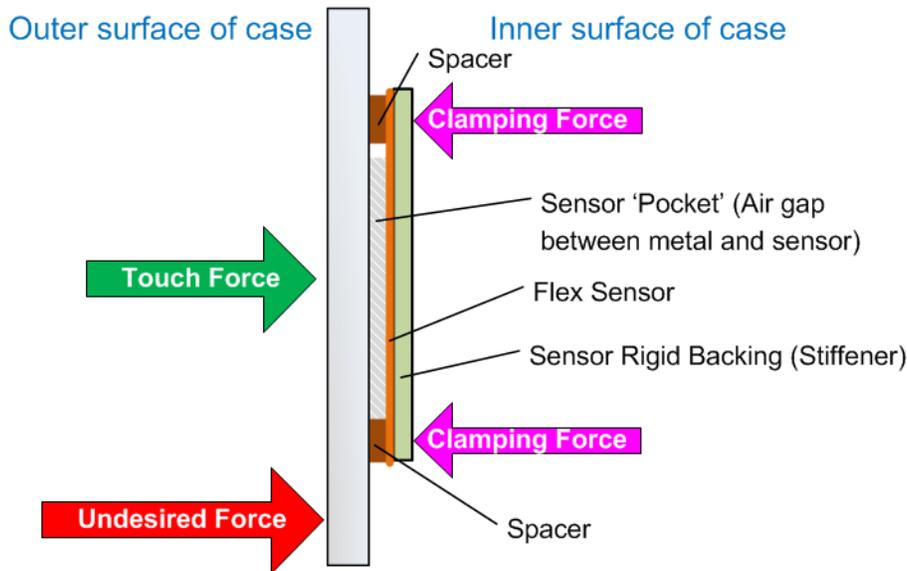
Button Construction With Metal Target and PCB Sensor
